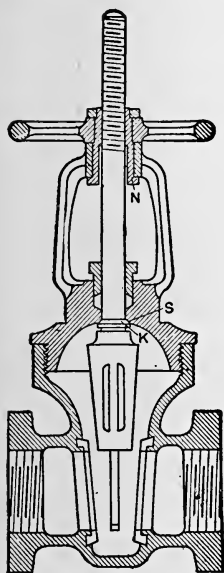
A Typical Gate Valve, Solid-wedge, Screw-top, Outside Screw.
